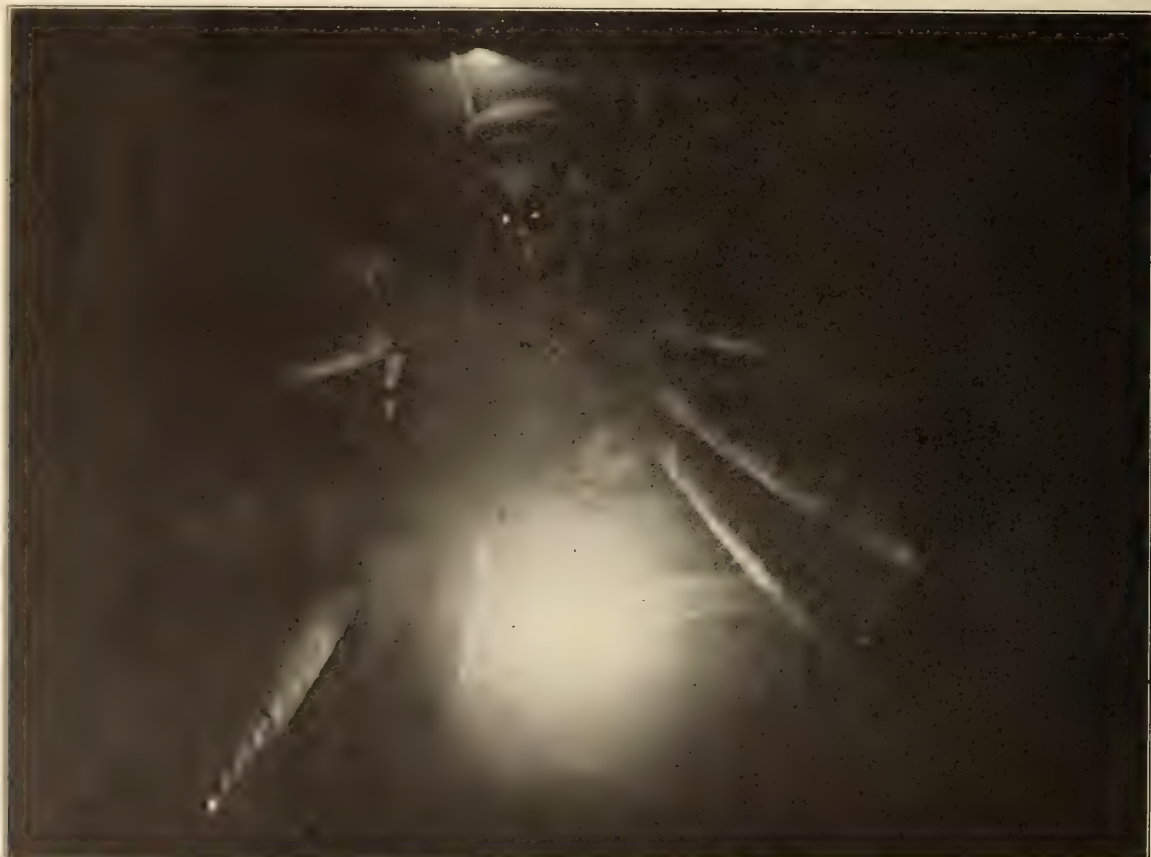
B.—Closer view of cutting 6-inch shaft—Courtesy of the Siche Gas Co., Toronto.
